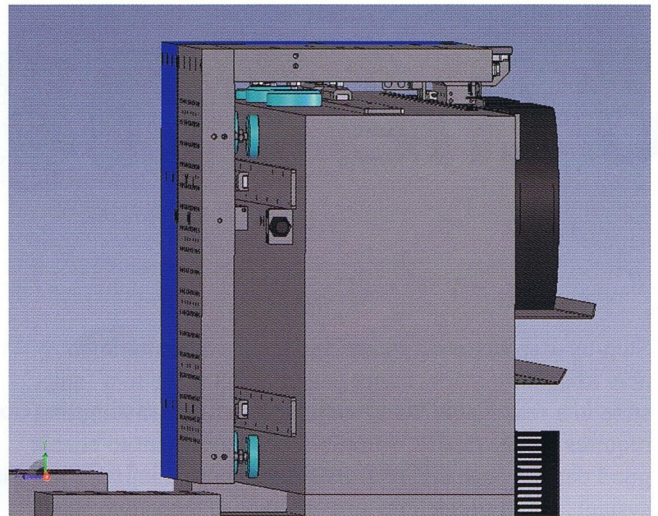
Sideview of the upper axis carriage, showing the guidance air-bearing pucks.
